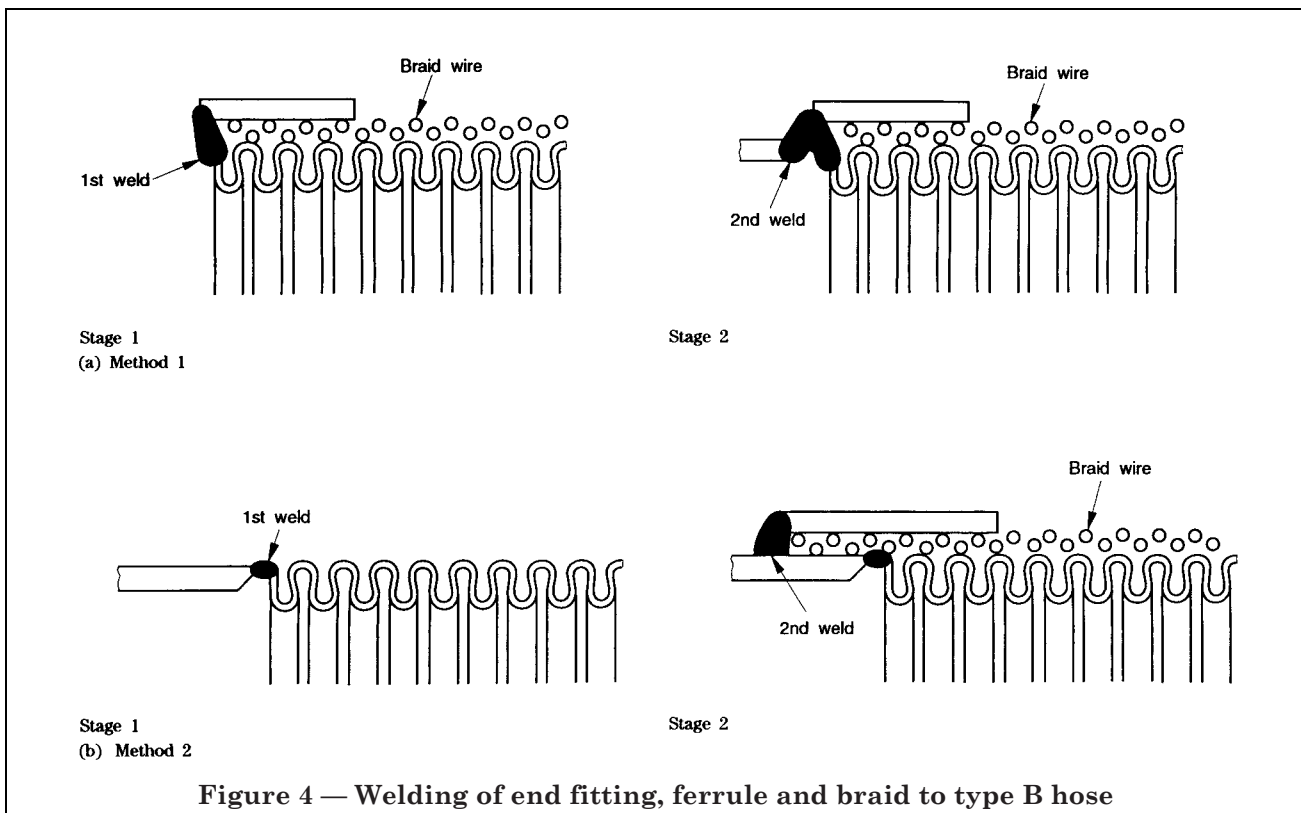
Welding of end fitting, ferrule and braid to type B hose
